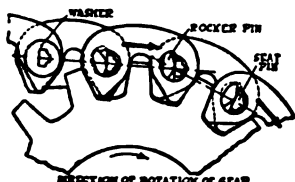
in replacing the chains, make certain that the arrows point in the direction of rotation, and that the rocker and seat pins are in the position shown. Otherwise the chain will quickly ruin itself
